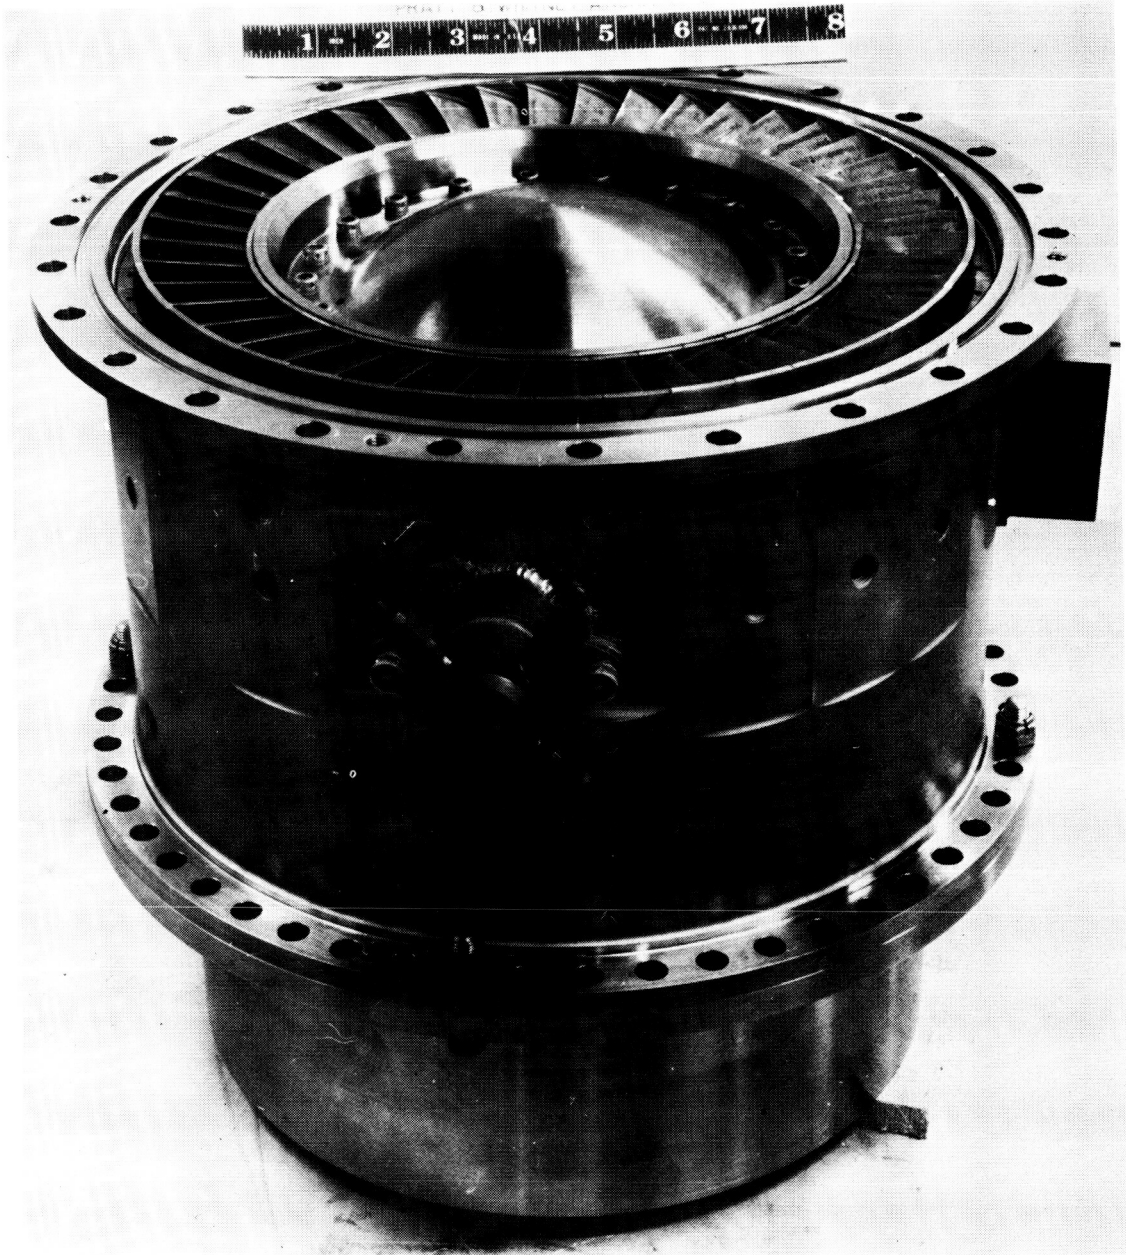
Inlet Assembly With First-Stage Nozzle Vanes M-36255
